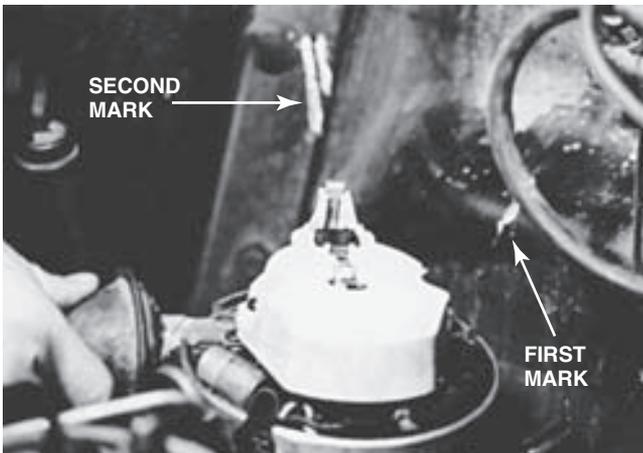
The first mark indicates the direction the rotor is pointing when the distributor is in the engine. The second mark indicates where the rotor is pointing just as it is pulled from the engine.
